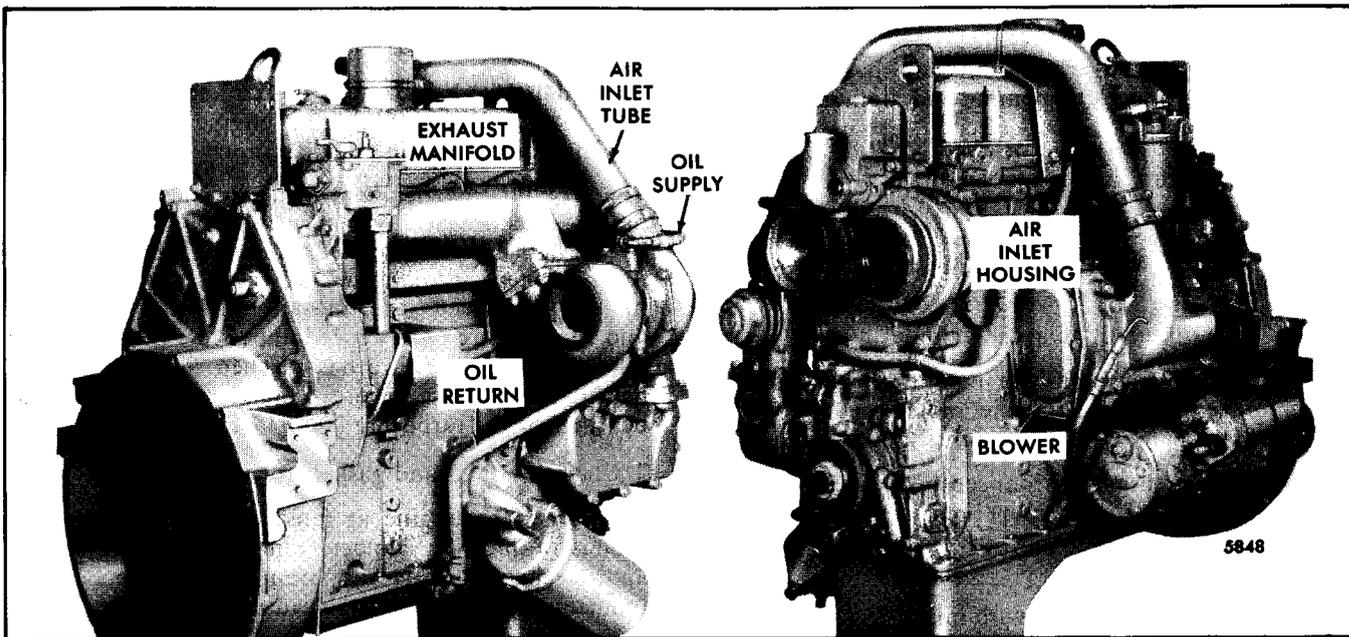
T04B Turbocharger Mounting (In-Line Engine)
